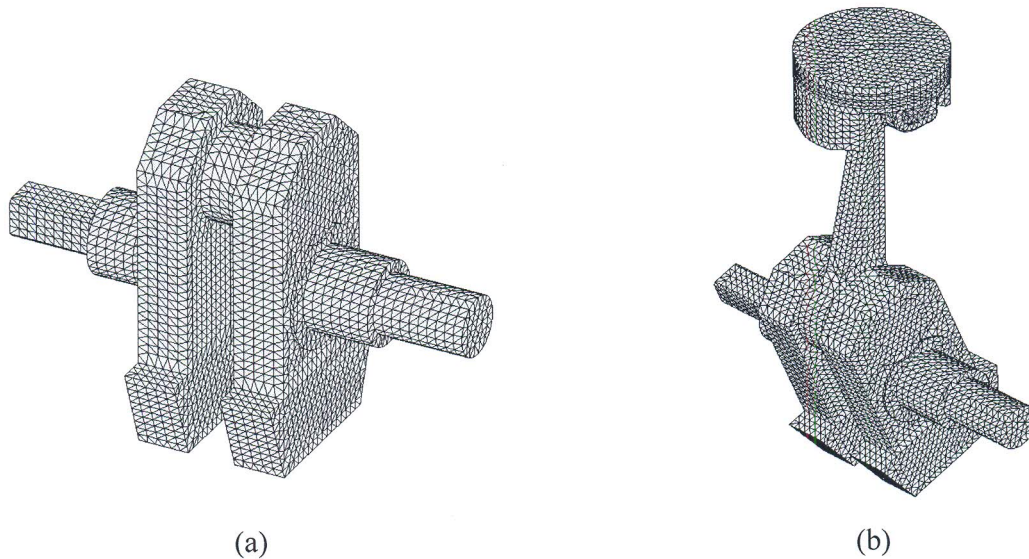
A 3D solid element meshes (a) crankshaft model (b) piston-crankshaft assembly model
